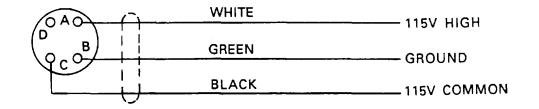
Cable Assembly CX-4686/U, drawing number SM-D-422981.
